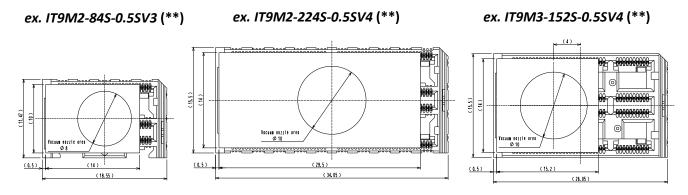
Pick Points of IT9 Receptacle (dimensions in mm)
